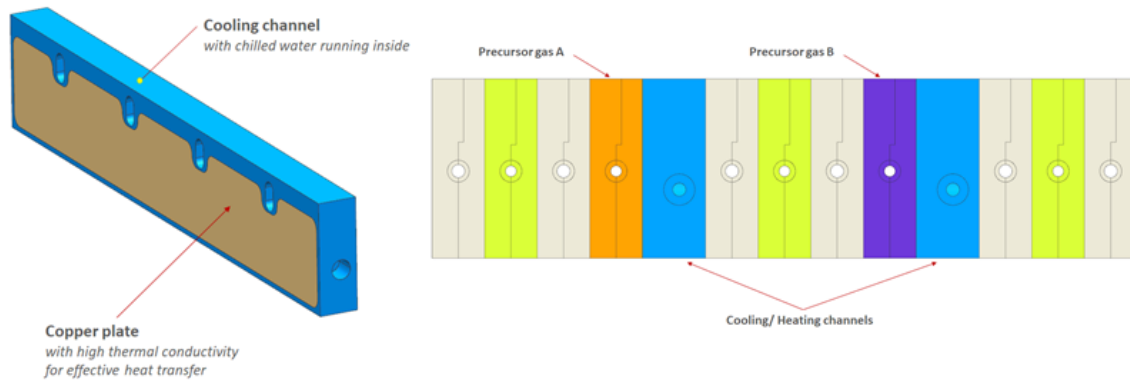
A side view of the cooling channel and the placement of the cooling channels beside the precursor gas components.
